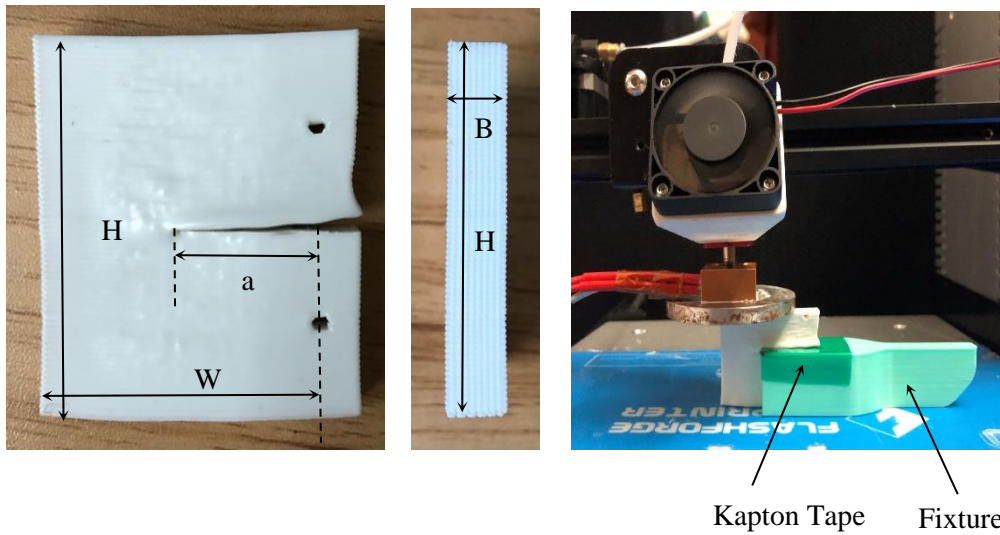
Fabrication of fatigue, fracture and geometry specimen
